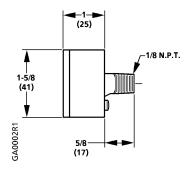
Dimensions of the 1-1/2 Inch Gauge.
